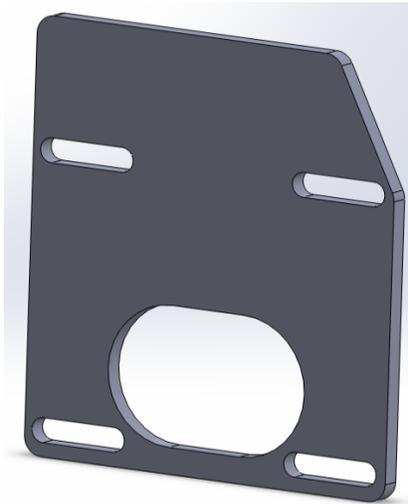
A drawing of the slotted bracket used to mount the steering actuator.
